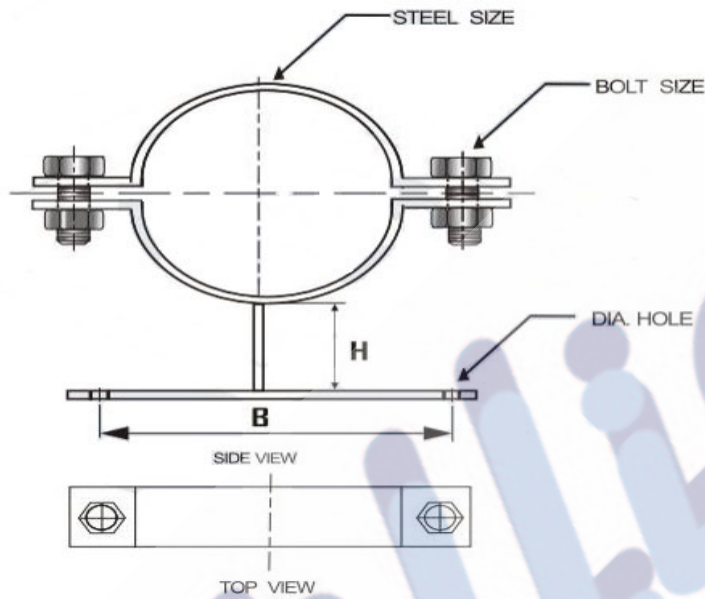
FIGURE : PIPE CLAMP APPLICATION (PC)
